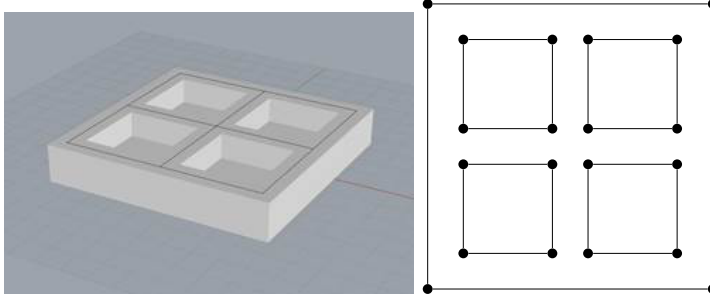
A prototypical workpiece (*left*) and a single layer of it (*right*)
